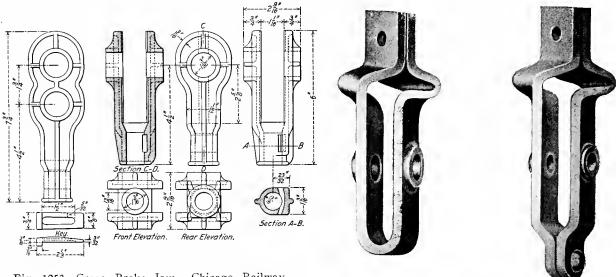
Creco Brake Jaw. Chicago Railway Equipment Company.
